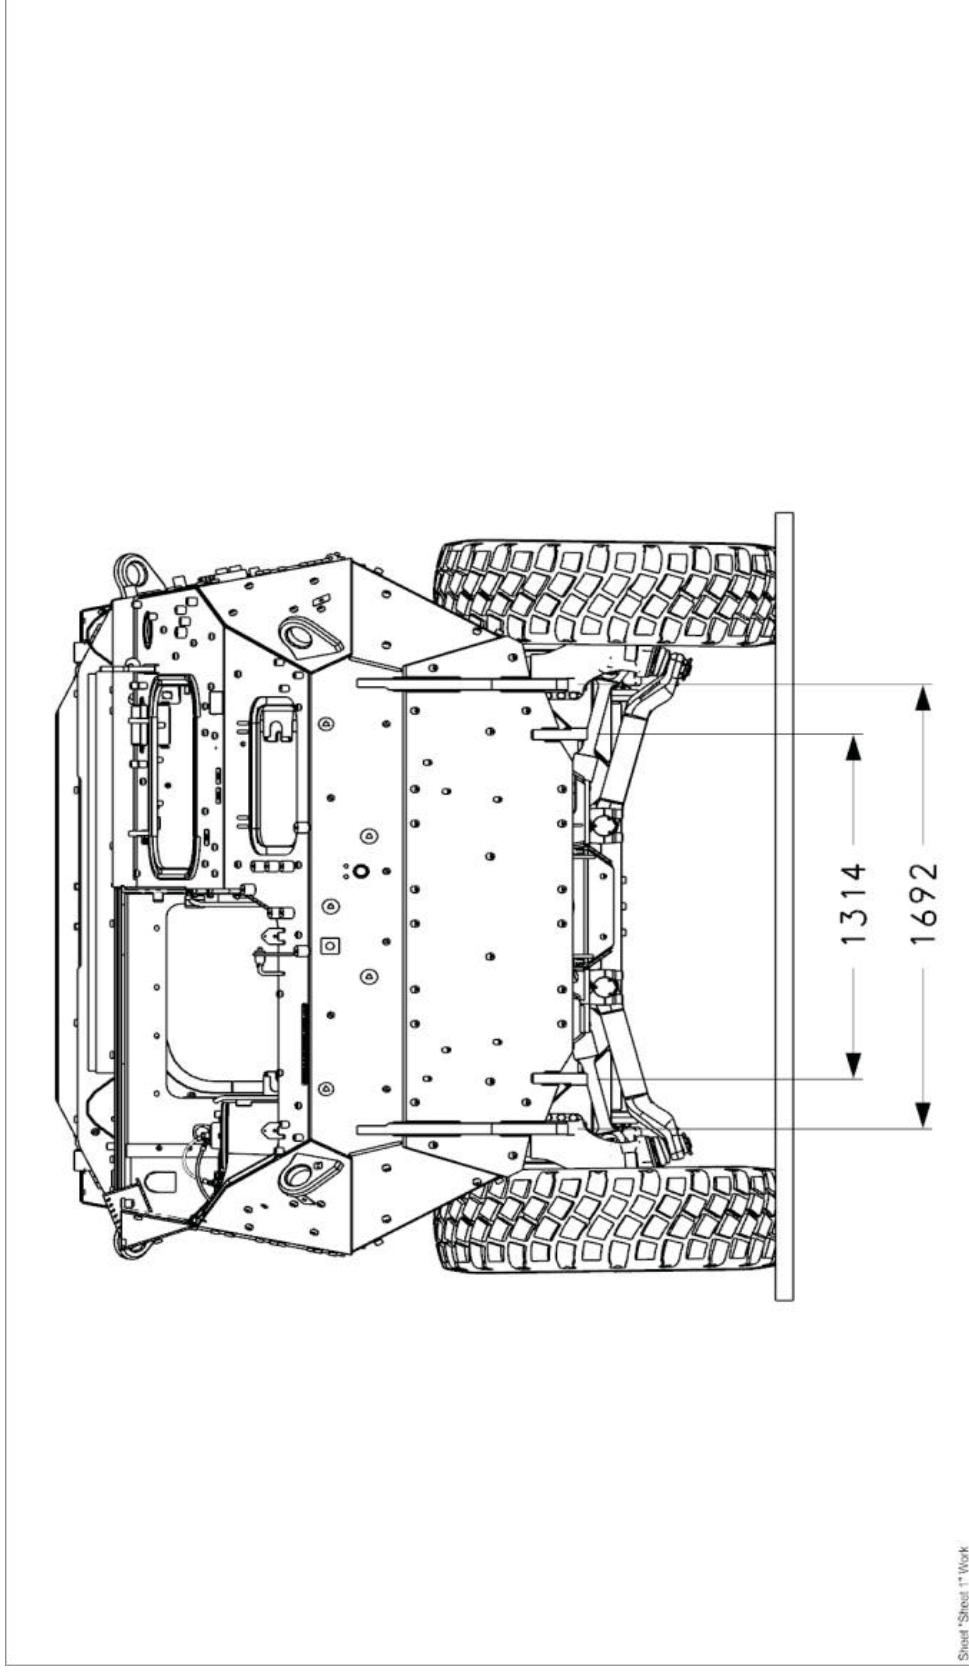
Tow Lug Dimensions – LAVUP FR
